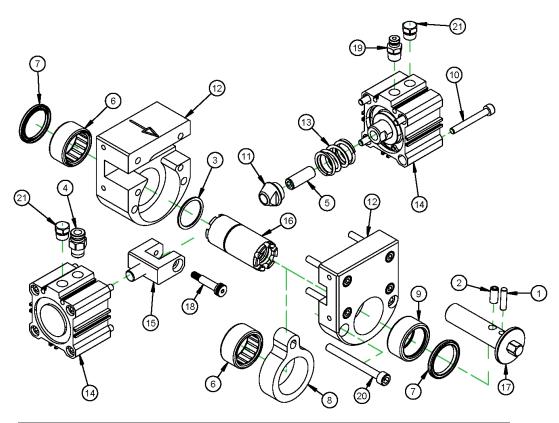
ID/OD CHUCK 45-120" FOR TURNING WITH MILLING ARM ASSEMBLY (P/N 62666)
